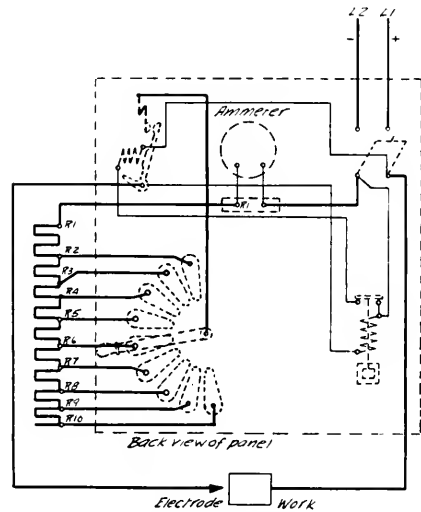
Connections of Auxiliary Arc Welding Control Panel for One Welding Circuit
